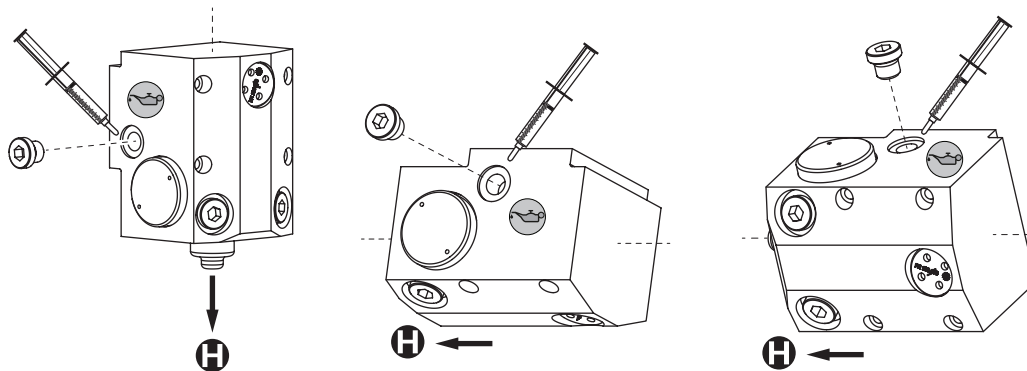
The position of the filler screws depends on the mounting orientation. Example: U versions
